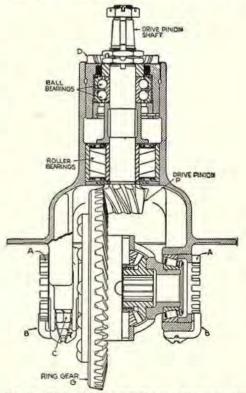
Differential gear carrier unit. The words "differential gear carrier," or "gear carrier," refer to the unit in which the gears are carried. On this axle, note that the entire unit is removable.
